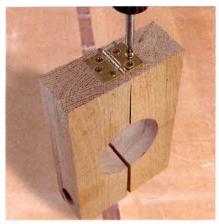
After gluing up 1 x 4 stock and crosscutting it to make the block halves, join them together with a large surfacemounted hinge.
